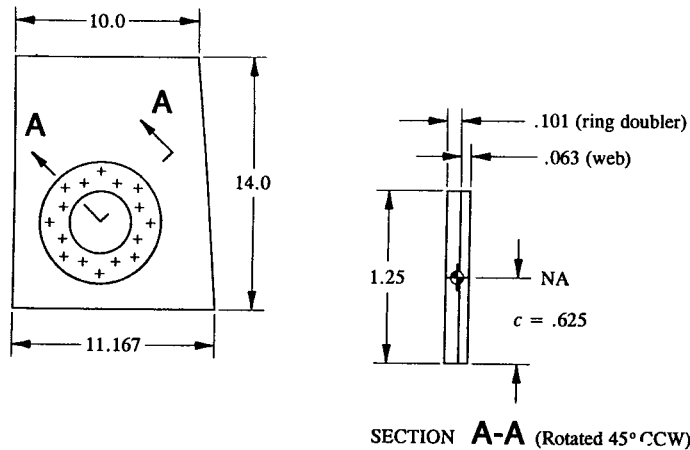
Panel dimensions and sectional area detail of the web and riveted doubler.
